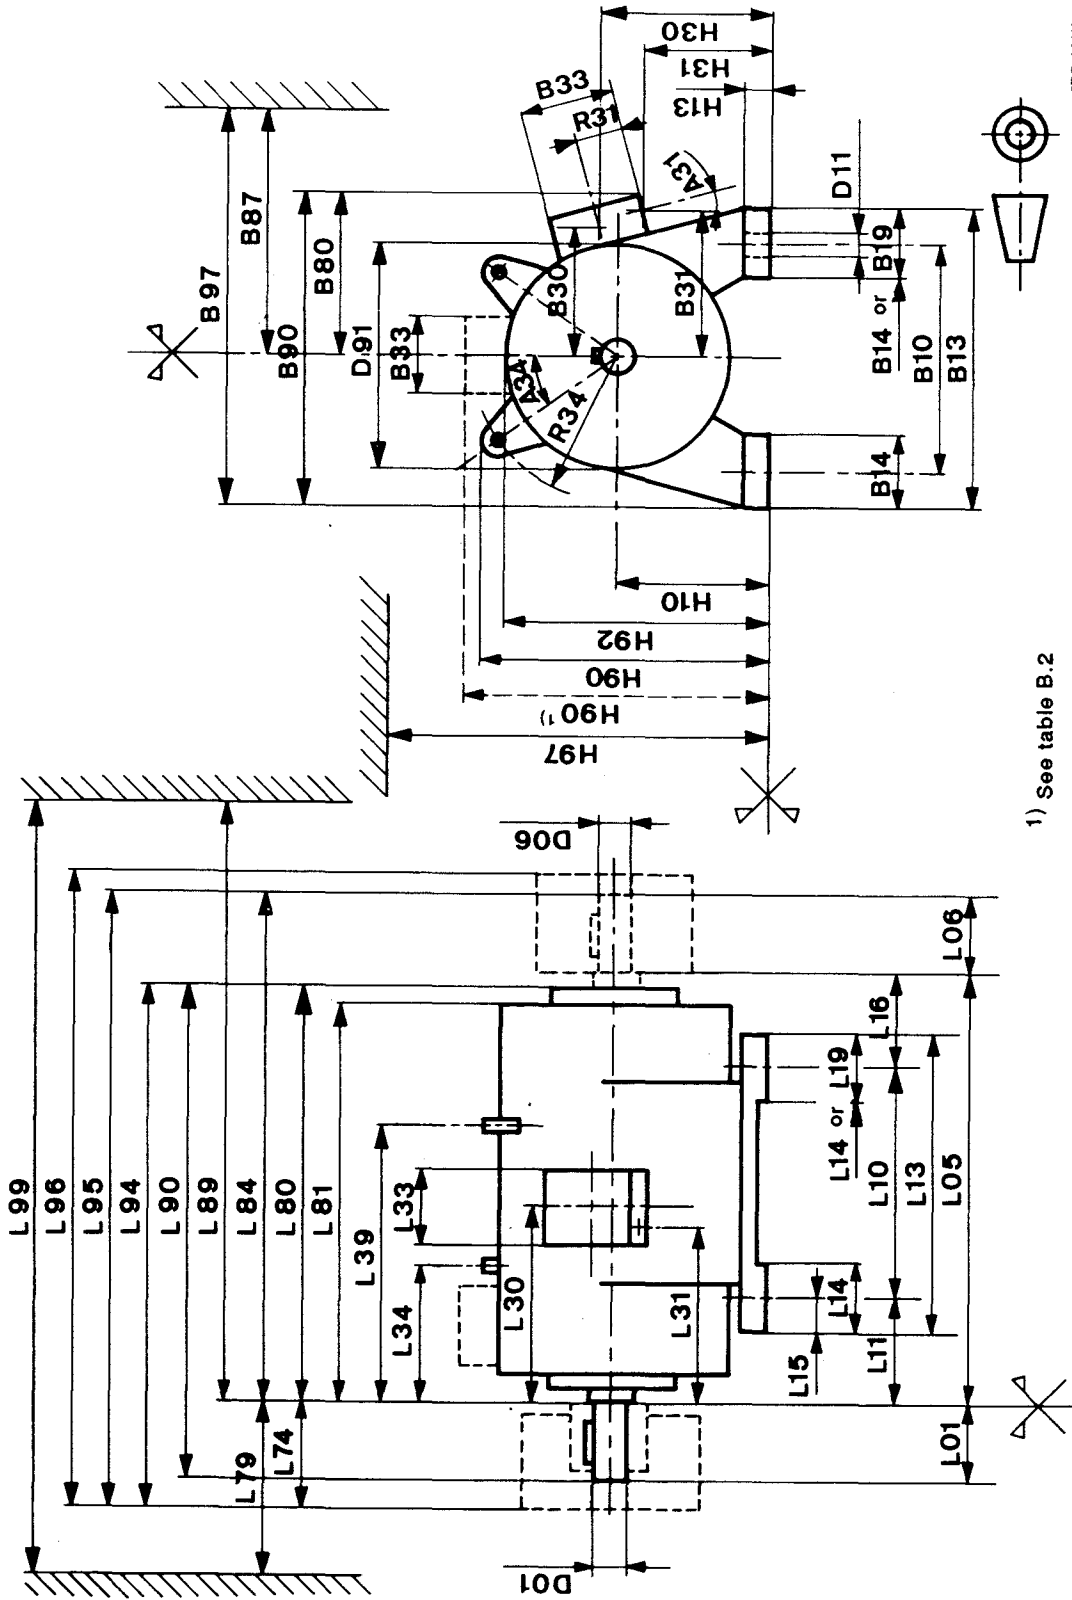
Mounting dimensions for foot-mounted machines with feet down
